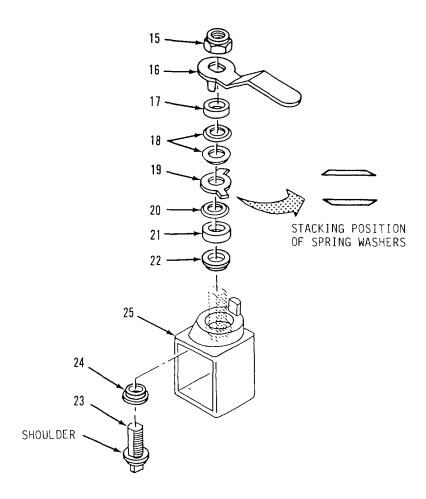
Quick Acting Valve Repair (Sheet 2 of 2)-
